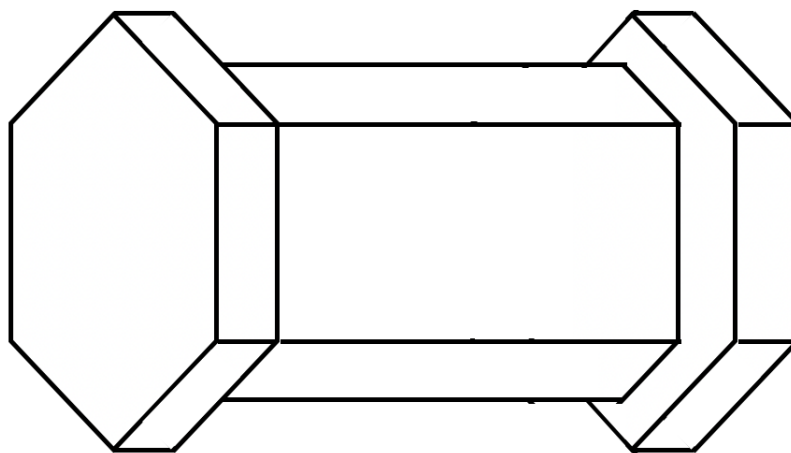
Proposed design shape and outline, can either be placed horizontally or vertically.
